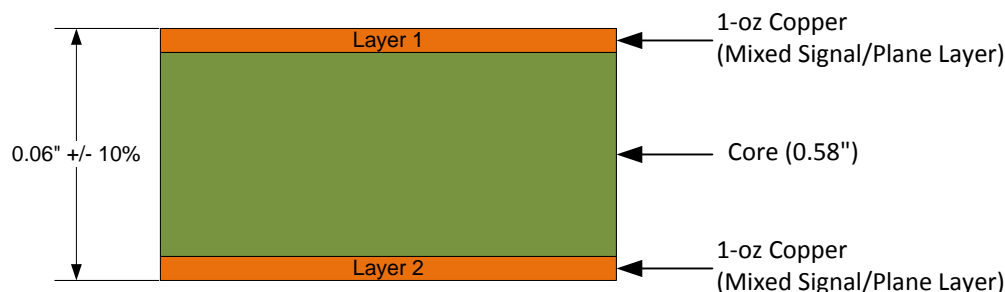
Typical 2-Layer PCB Stackup With Routing Assignments
